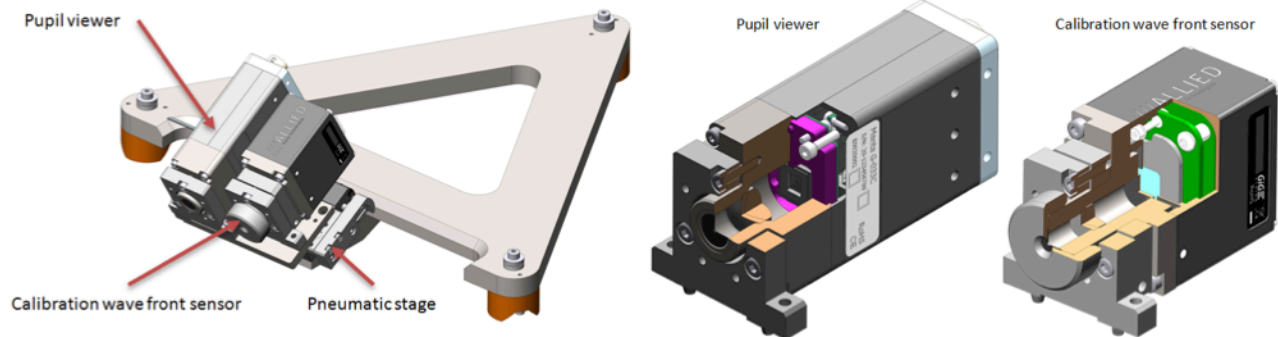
Acquisition Camera. (Left) ACAM assembled under the GP/WFS assembly, (Right) The rear view of the ACAM.
